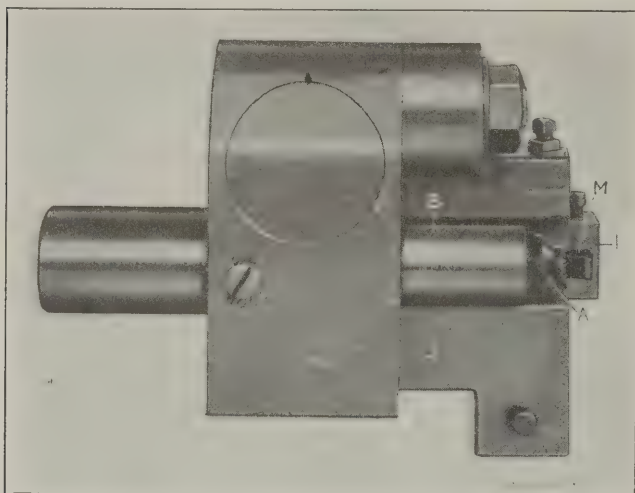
Oil Groove Cutting Tool showing Driver and Cutter
